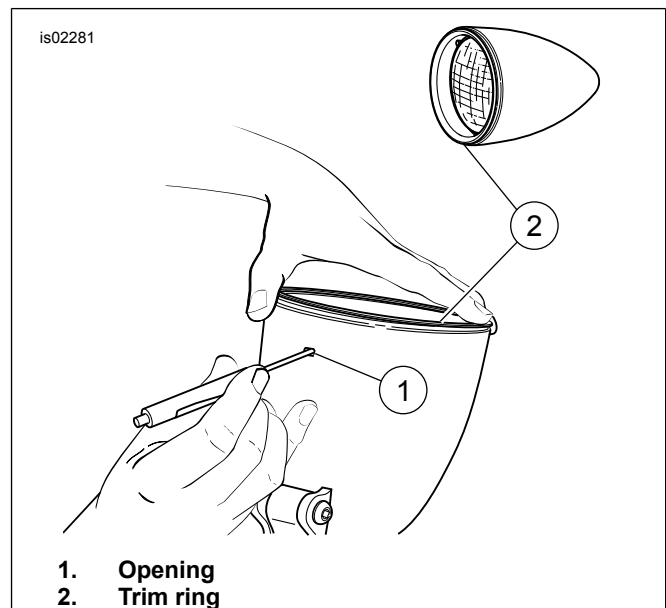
Pry Bottom of Trim Ring Away from Headlamp Shell
